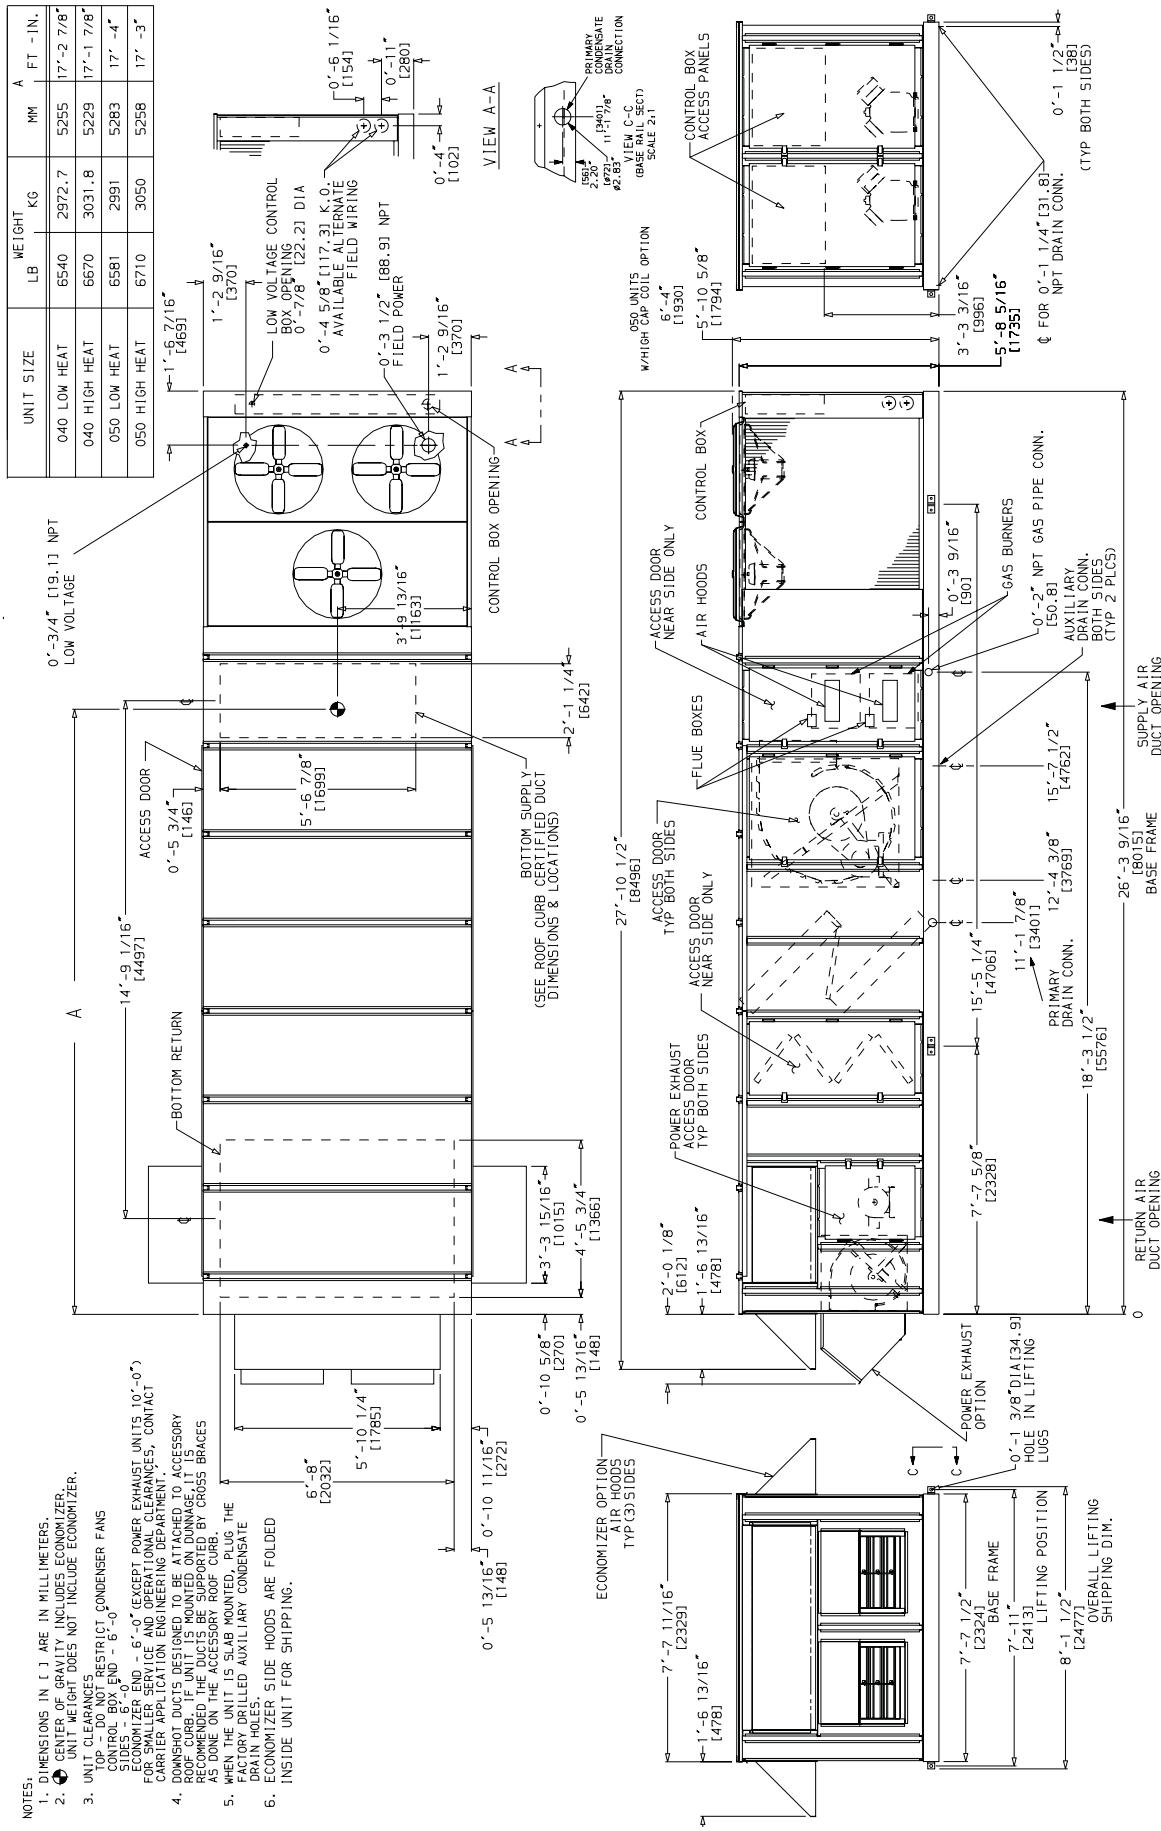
Base Unit Dimensional Drawing — 48ZGZN040,050 (Standard Chassis)
